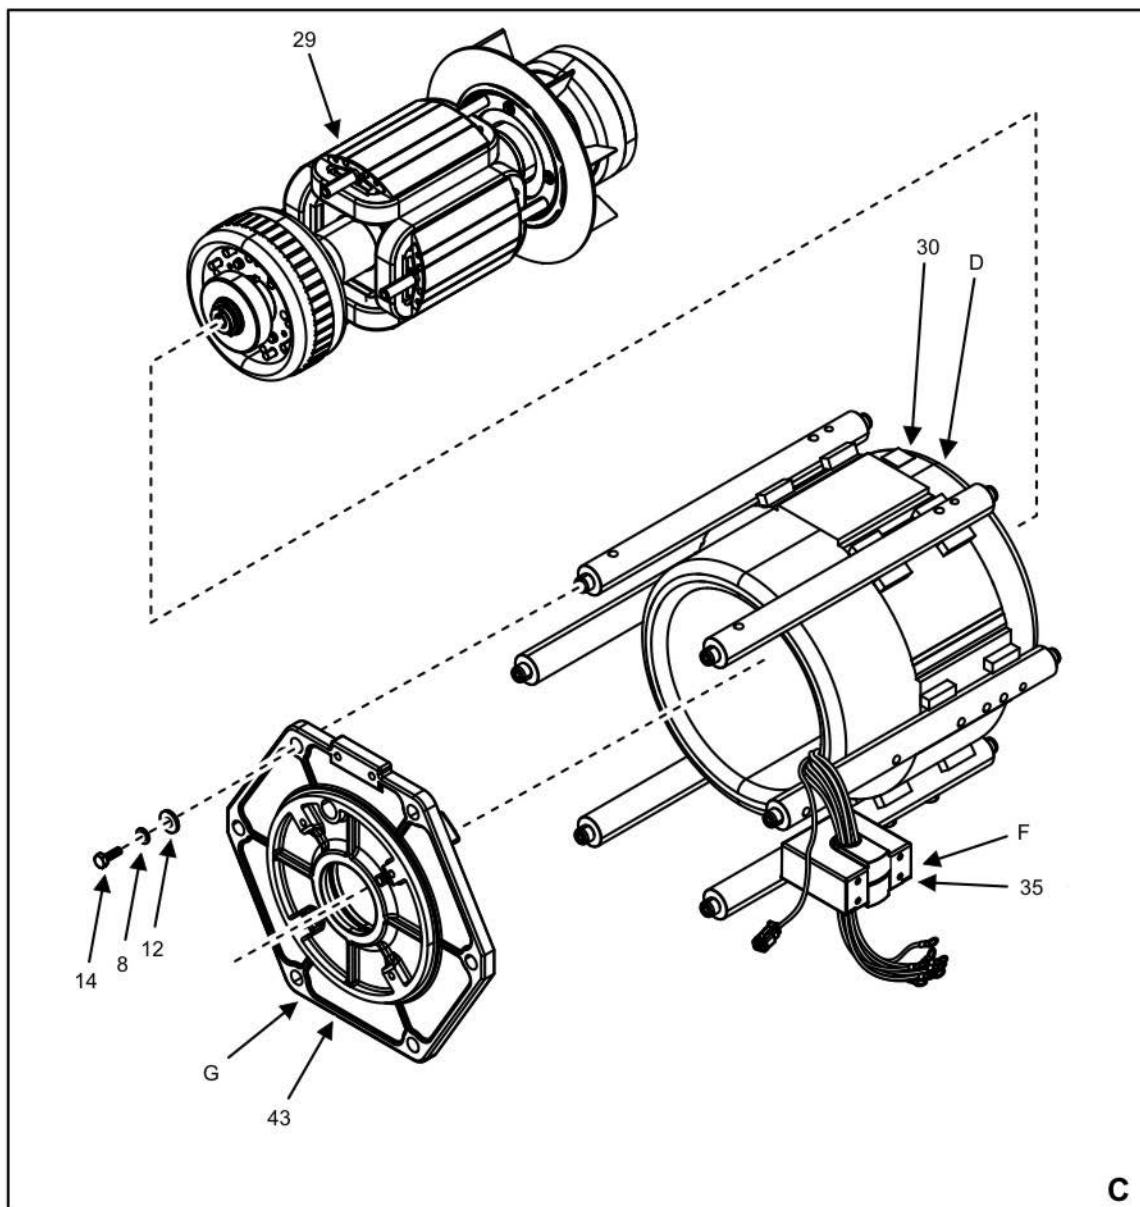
AC Generator Assembly, 50/60 Hz (Sheet 3 of 5).
